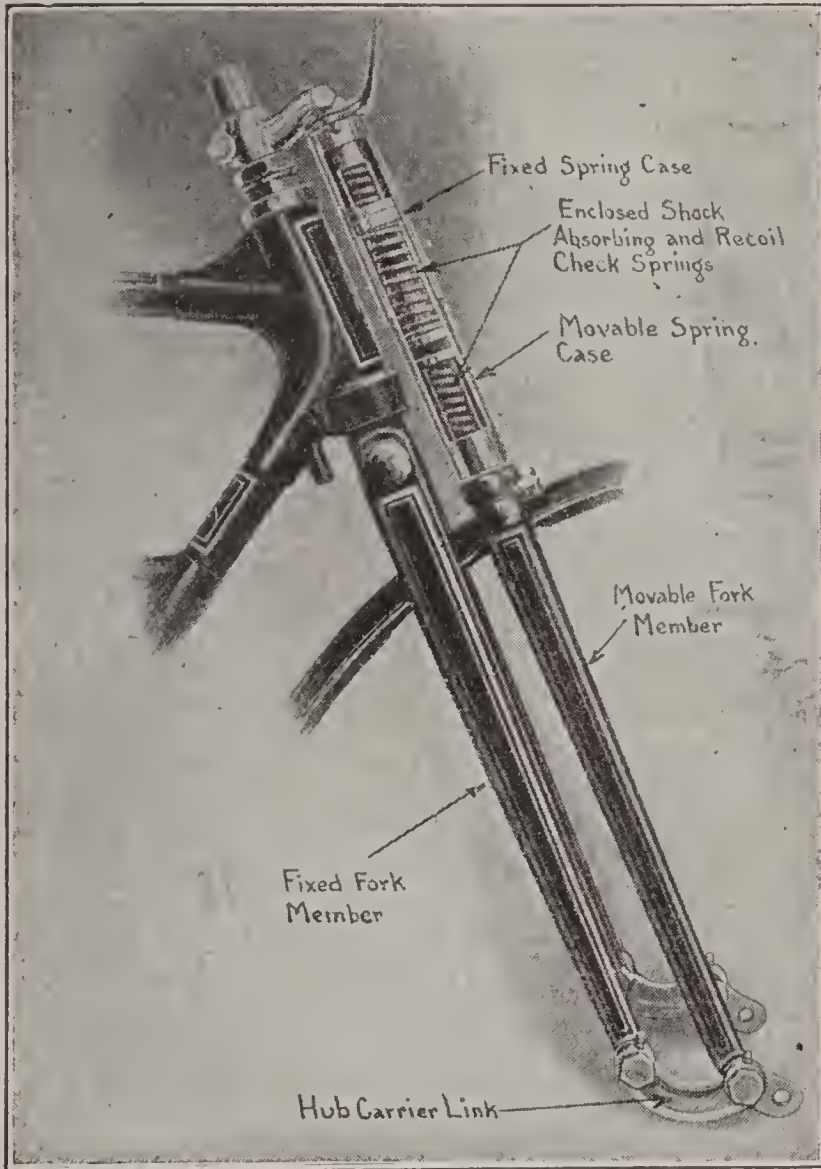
Sectional View of the Spring Case of Reading-Standard Spring Forks, Showing Load Carrying and Recoil Check Springs.
